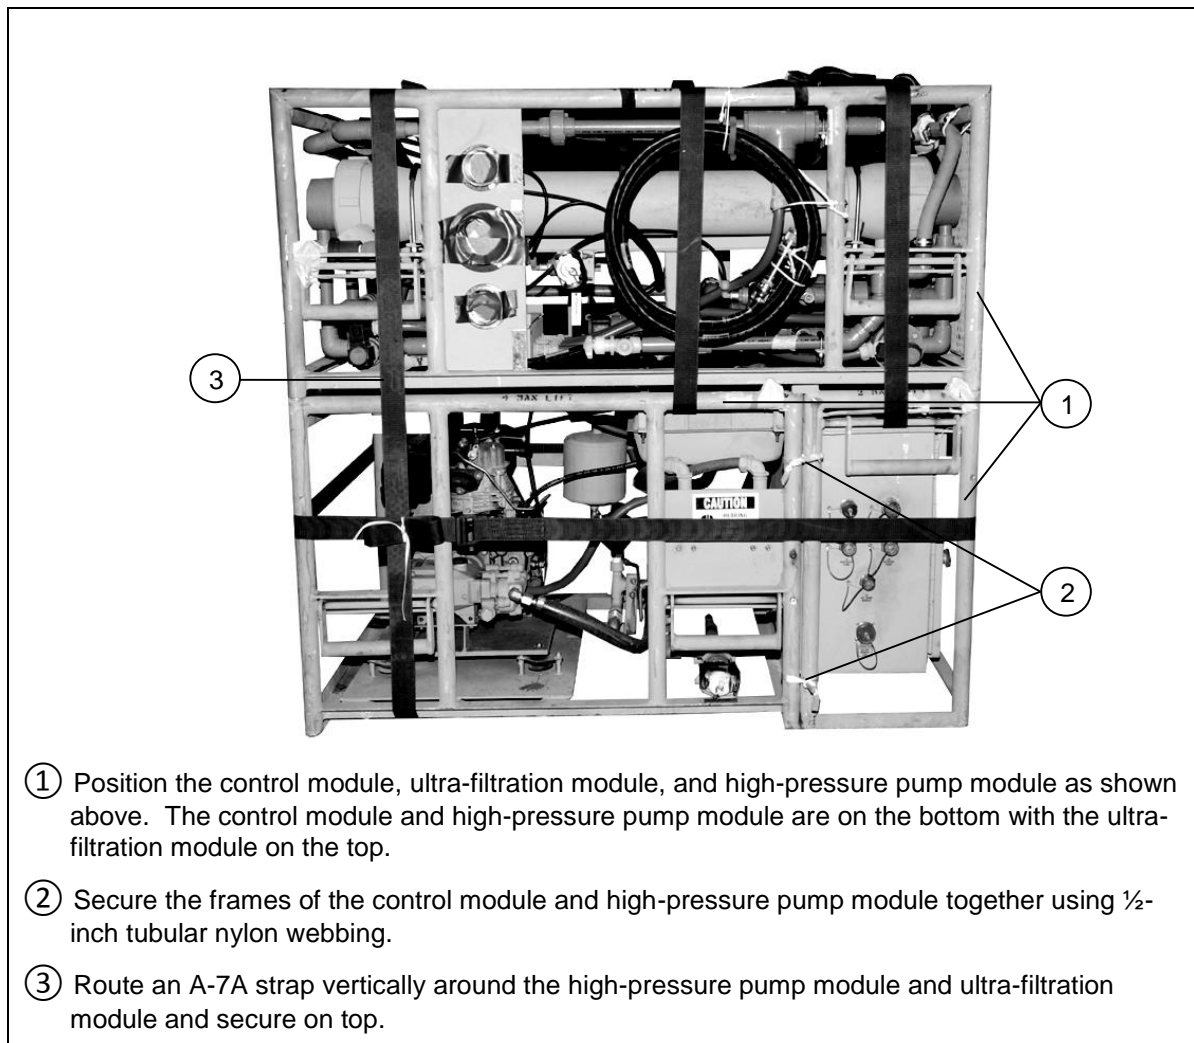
Equipment box 2 partially assembled and positioned for loading
